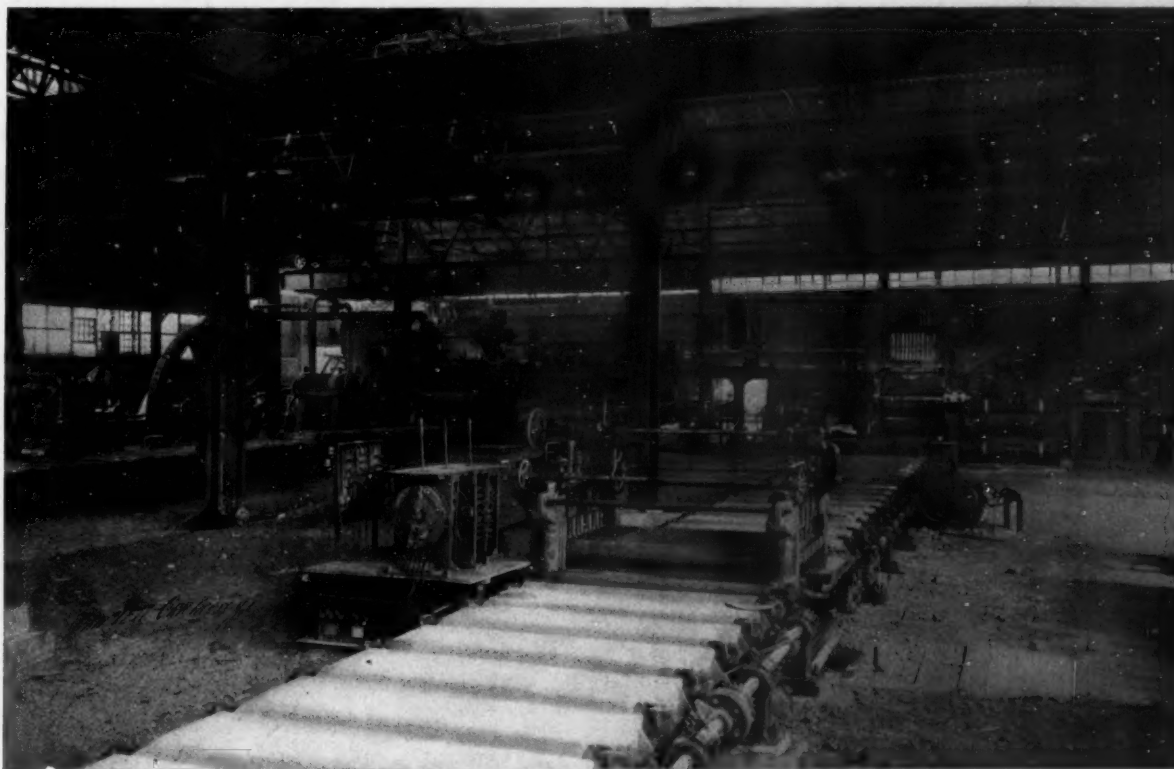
PLATE MILL AND TABLES, LA BELLE IRON WORKS, STEUBENVILLE, O.
